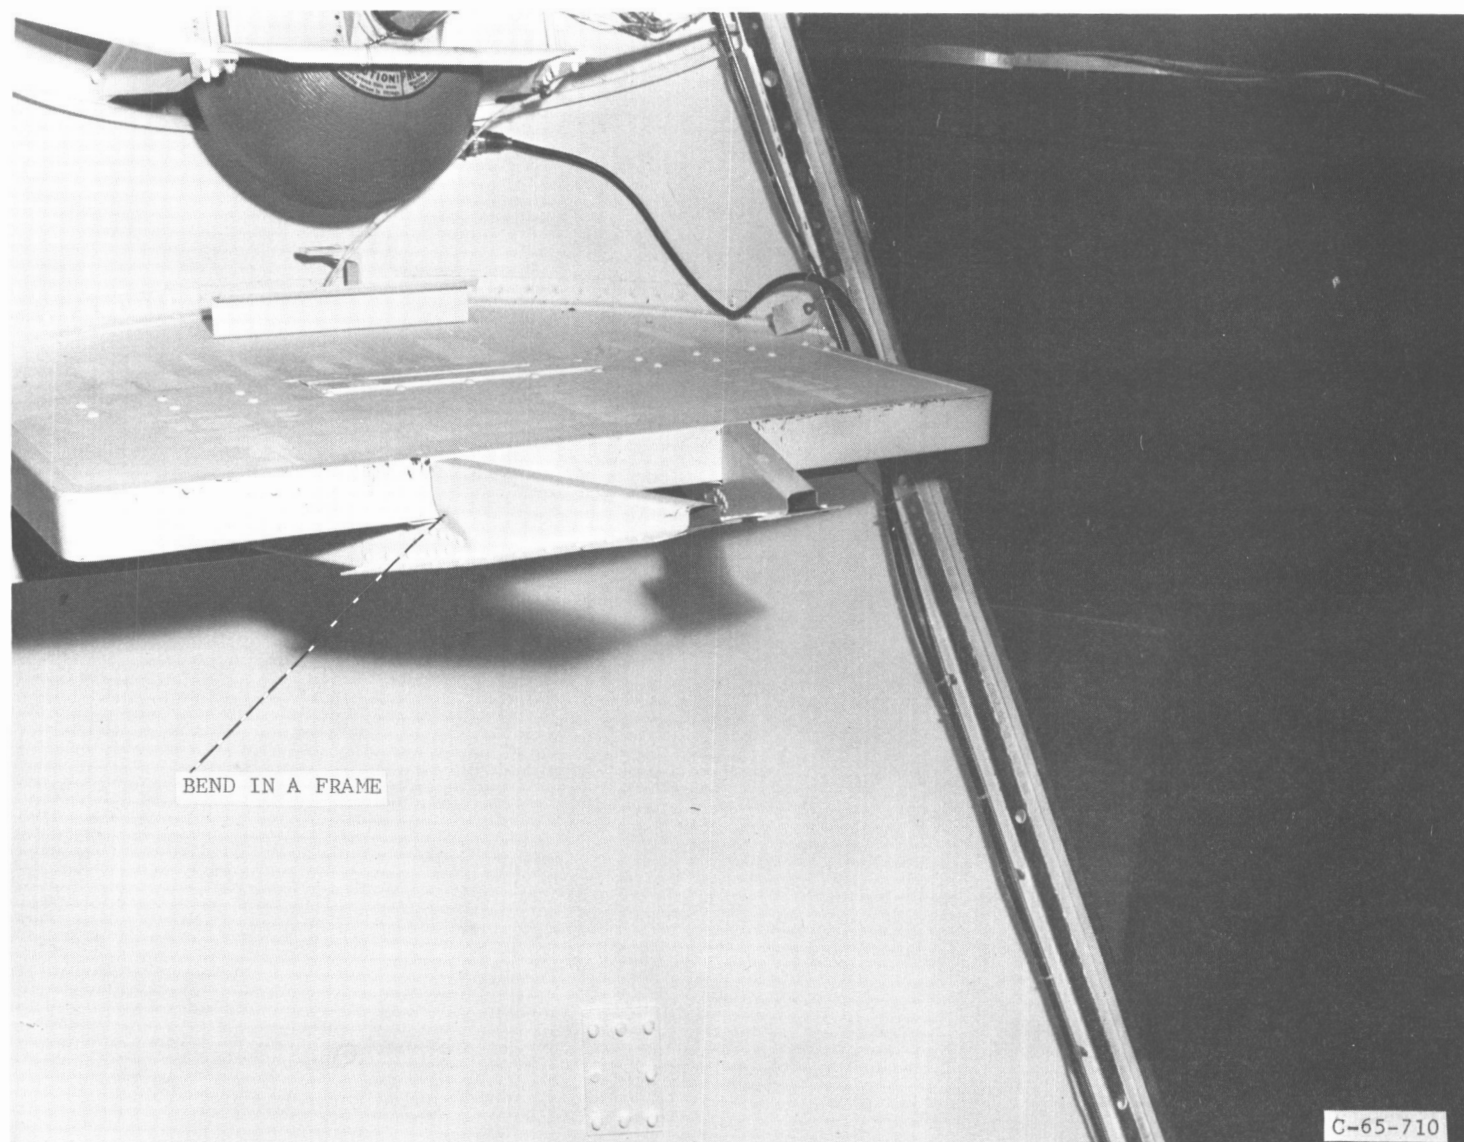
Damage to the deflector bulkhead A frame, test IA-1B.
